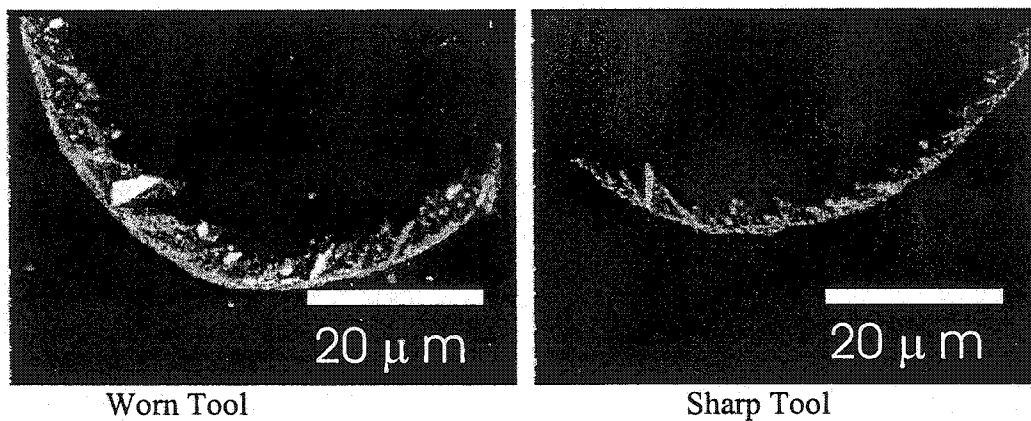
Chip morphology when finish milling using CBN cutting tools.
